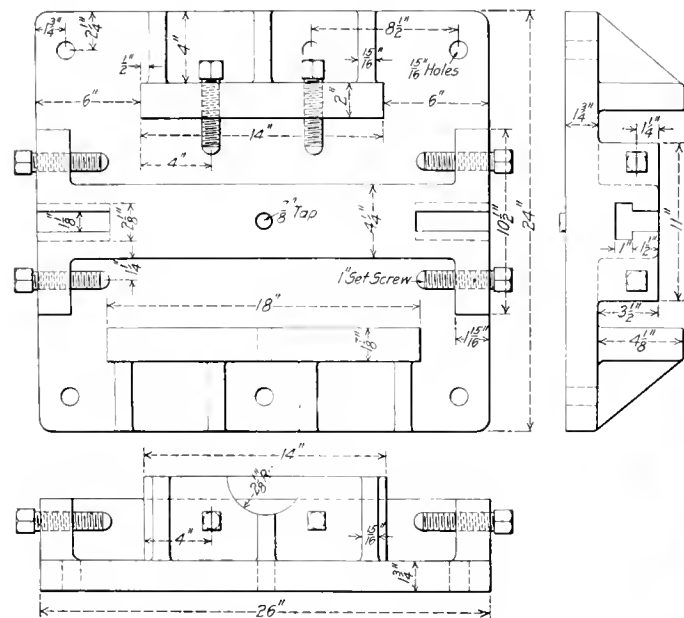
Jig Used on Horizontal Boring Machine When Boring the Crown Brass.
